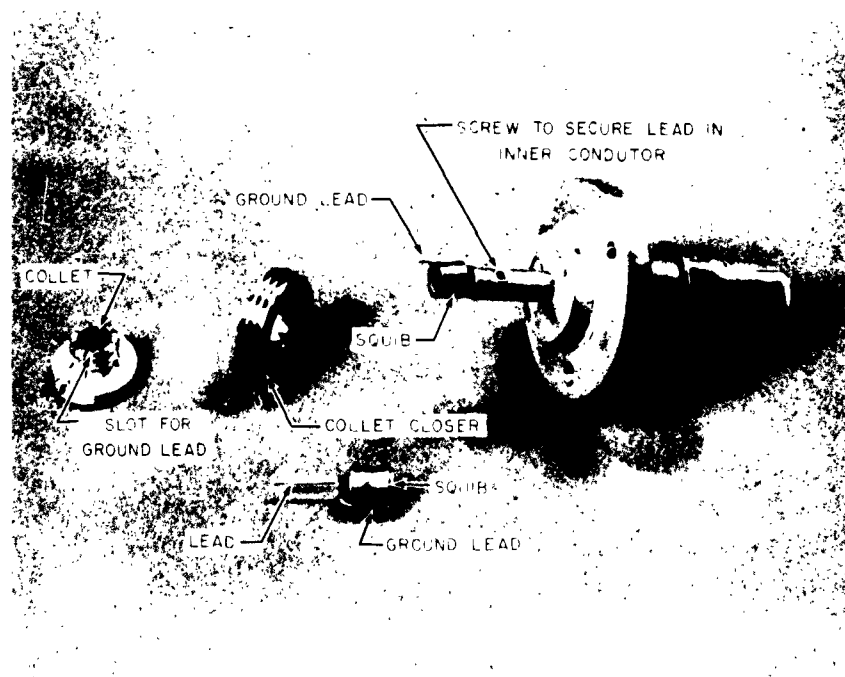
ADAPTER PARTS FOR ACCOMMODATING MARK I MOD O SQUIB
